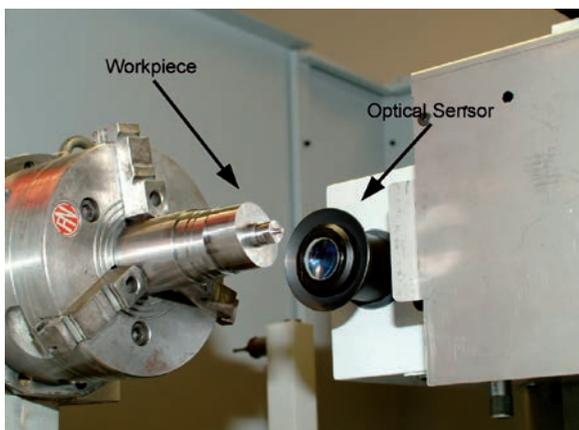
Cylindrical grinding machine with integrated optical sensor and workpiece.
